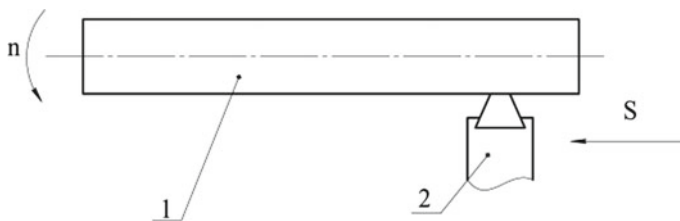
Polishing with an indenter with diamond tip: 1—treated workpiece; 2—diamond burnisher
